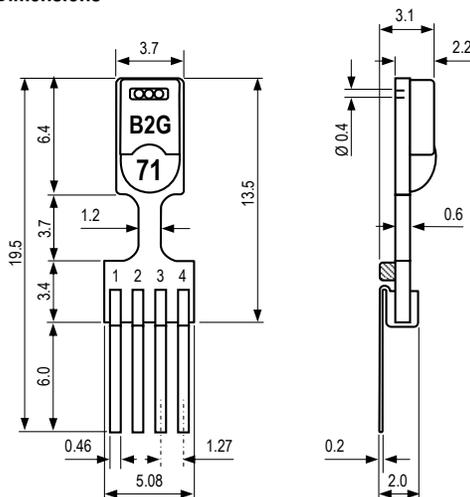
Drawing of SHT7x (applies to SHT71 and SHT75) sensor packaging, dimensions in mm (1mm = 0.039inch). Contact assignment: 1: SCK, 2: VDD, 3: GND, 4: DATA. Hatched item on backside of PCB is a 100nF capacitor – see Section 2.1 for more information.
